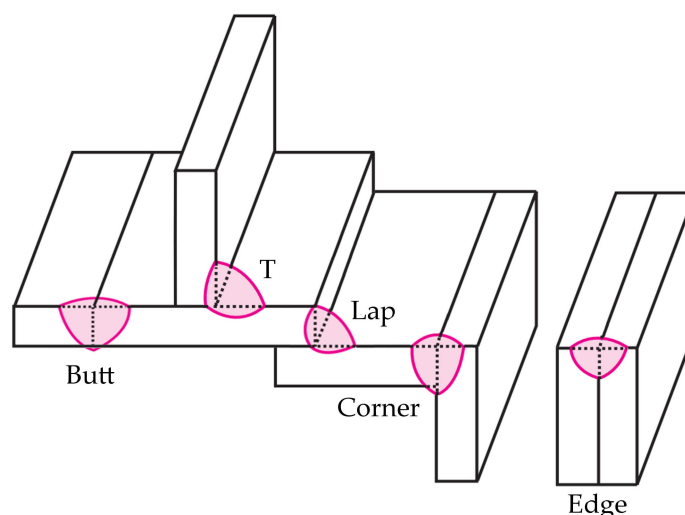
Schematic representation of the five arc welding designs according to Minnick [MIN 07].
